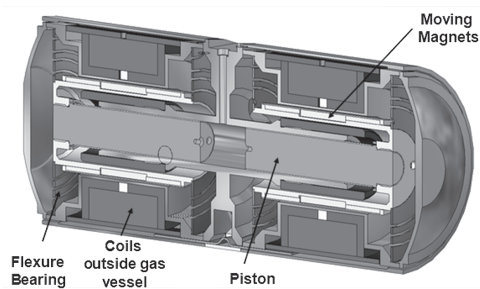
Principle design of AIM flexure bearing moving magnet compressors [2].
